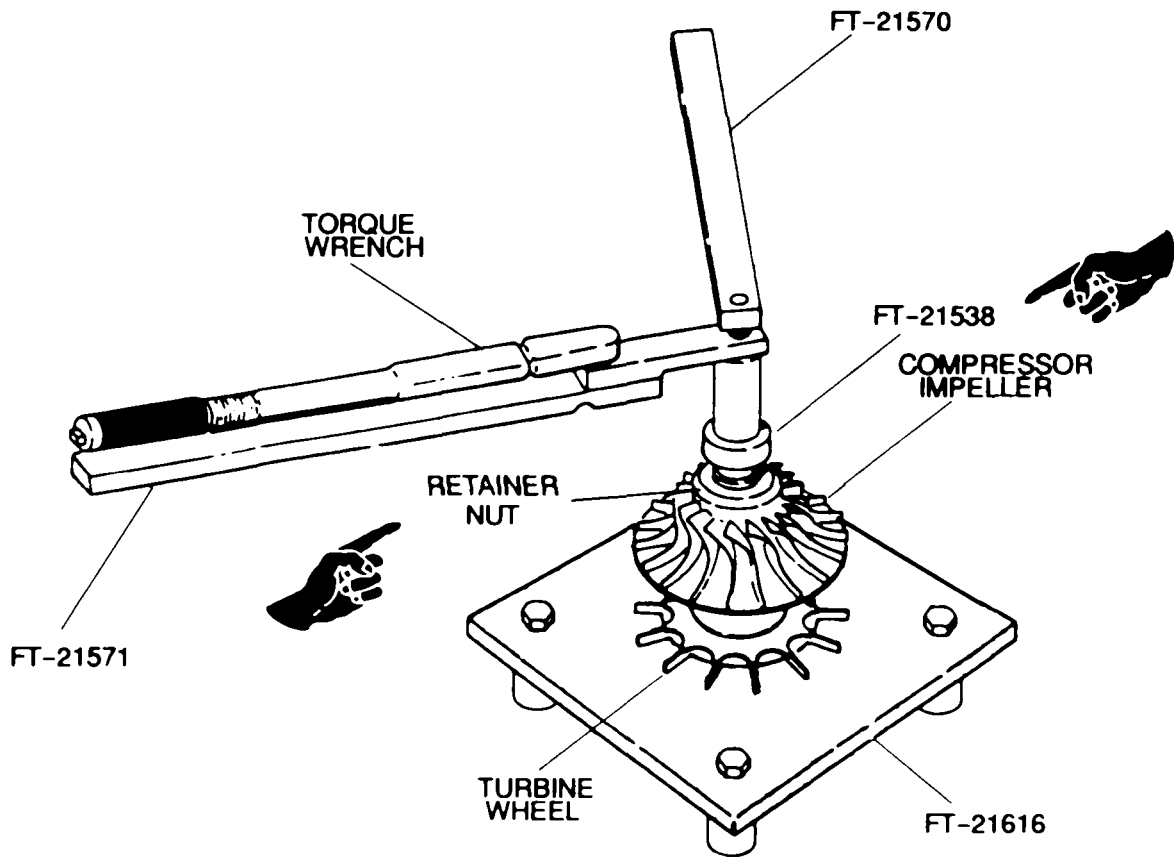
Removing/Installing Retainer Nut Using Fabricated Tools FT-21538, FT-21570, and FT-21571
